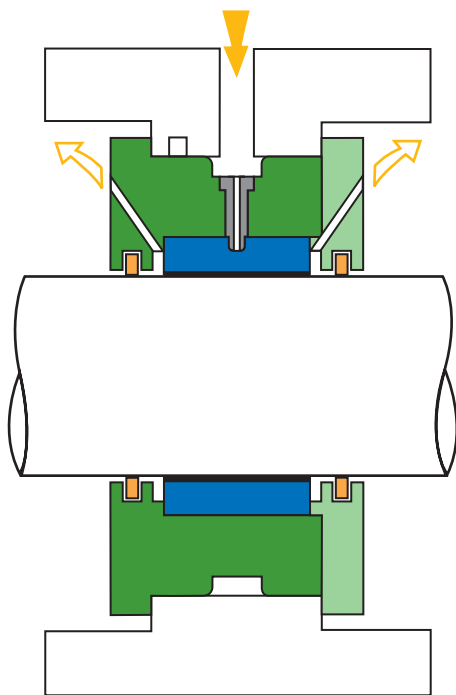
Orion Standard Tilting Pad Bearing, flooded design
